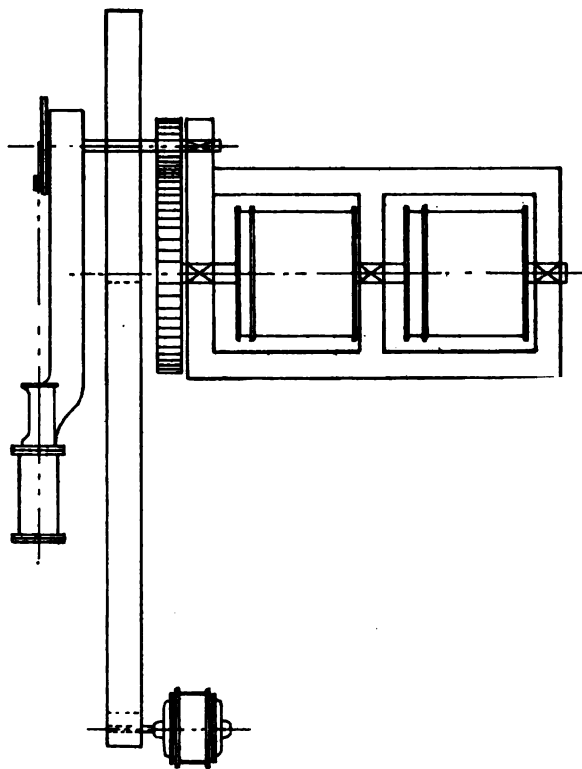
PARALLEL DRUMS DRIVEN BY EITHER ENGINE OR MOTOR.
